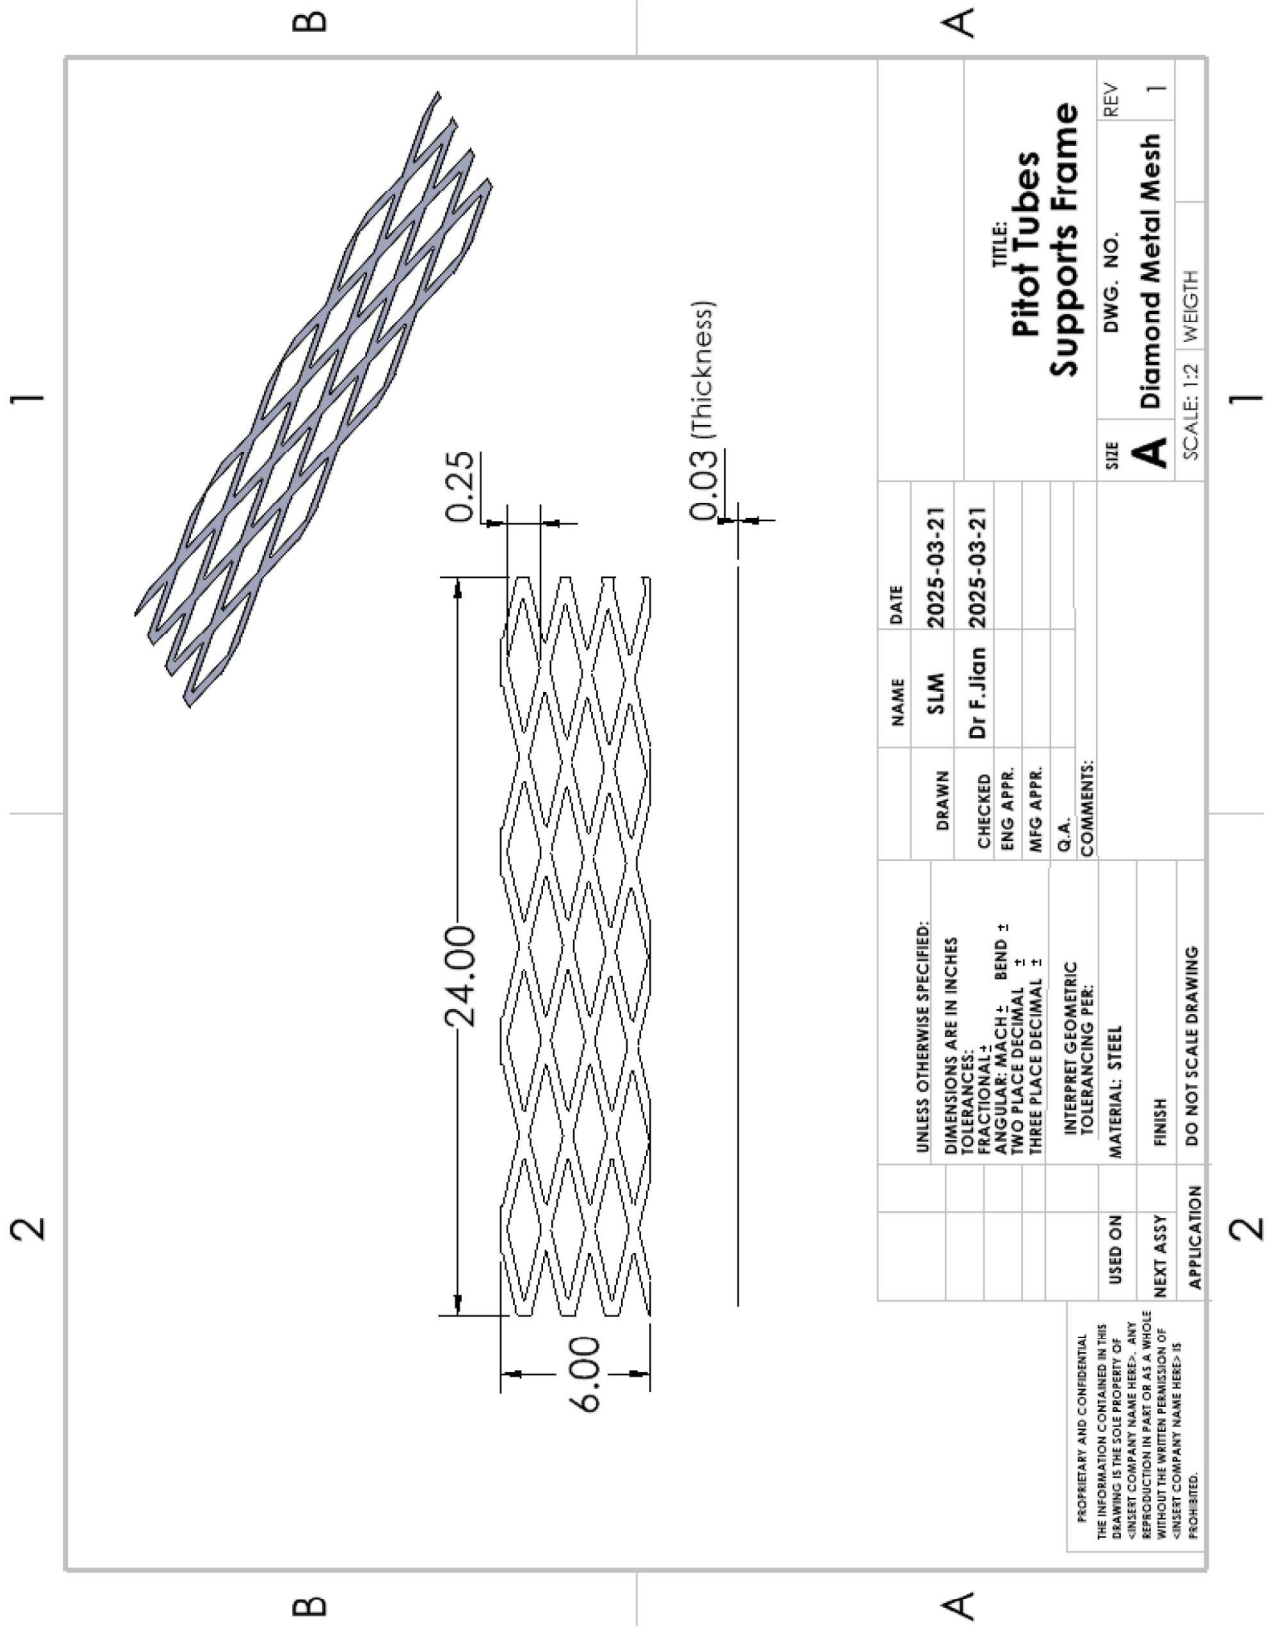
Detailed engineering drawing of the diamond metal mesh.
